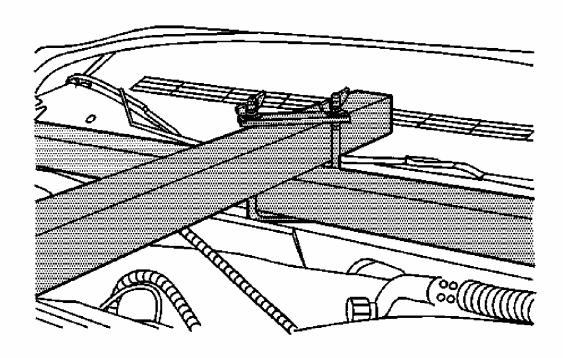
View of Cross Bracket Assembly Courtesy of GENERAL MOTORS CORP.
